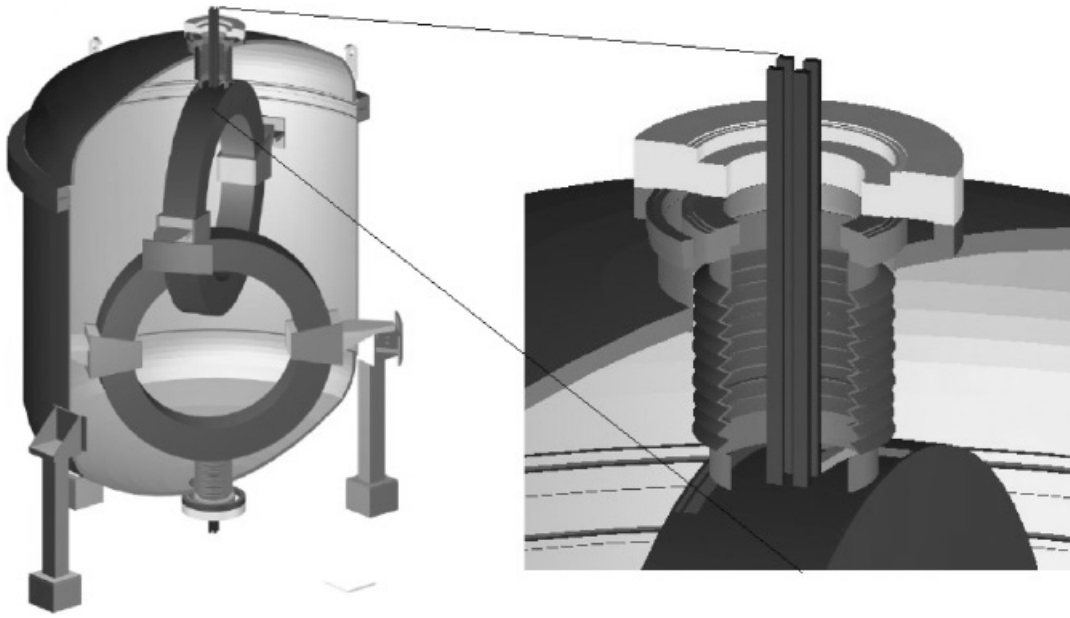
A 3-D rendering of the interlocked coils and their integration with the main vacuum chamber. On the left, a cutaway view of the vacuum chamber, the interlocked coils, and the bellows and flanges used to bring the coil leads out. On the right, a zoom-in on the top flange arrangement, showing four out of the ten coil leads, the formed bellows, the custom 17.15-cm flange welded to the formed bellows, a rotatable 25.4-cm-o.d. flange on the vacuum chamber, and the custom 25.4-cm flange used to couple the other pieces together.
